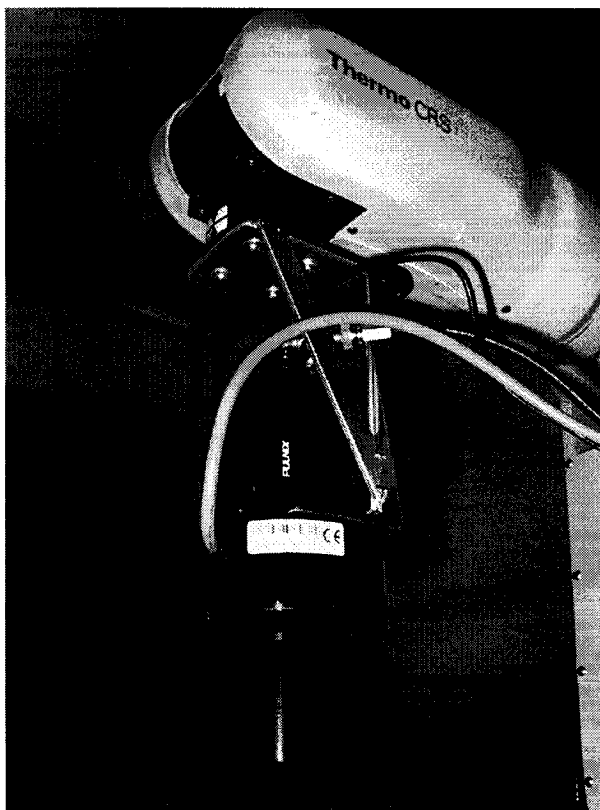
Calibration measurement head assembled to the Thermo CRS A456 Robot.
